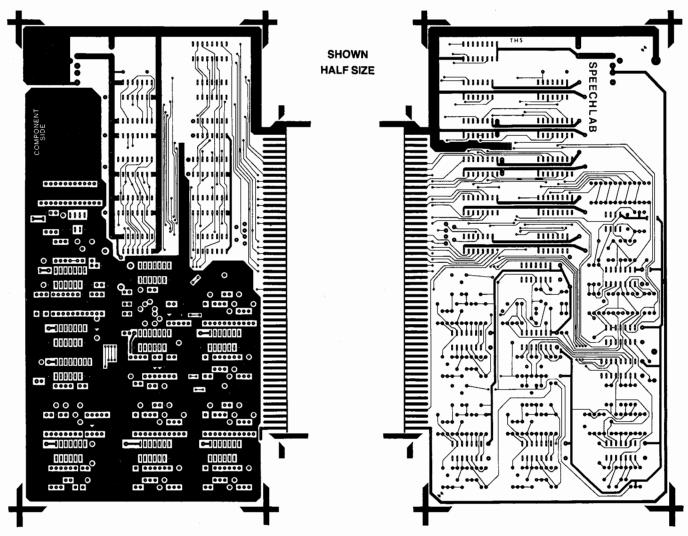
Etching and drilling guides for pc board are shown half size. Guide at left is the component side. Component layout is in Fig. 9.
